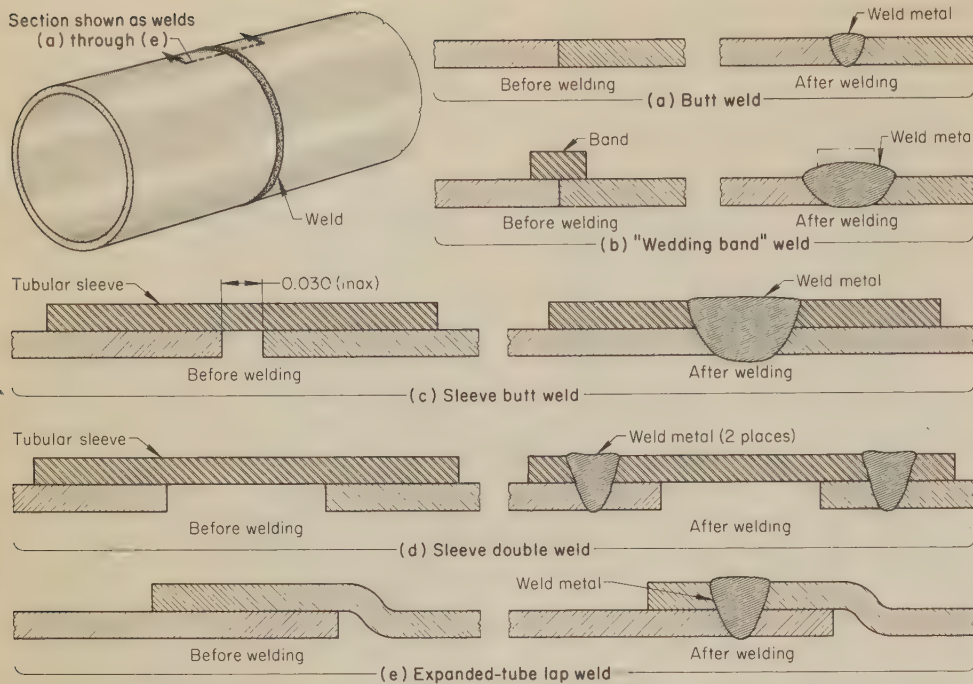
Five designs of welded tube fittings for aircraft hydraulic systems
